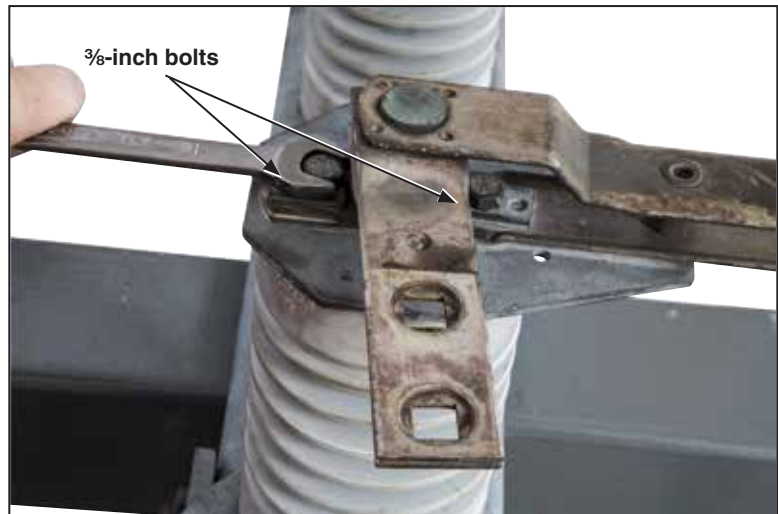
Remove the bolts securing the blade to the insulator. Clean insulator if necessary.
